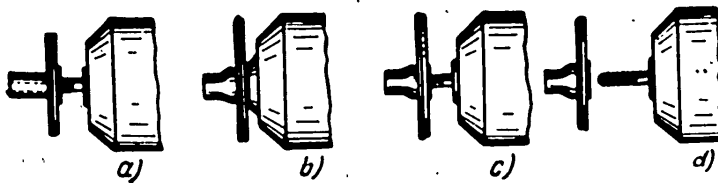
Sequence of Operations in Riveting Threaded Shell Rivets with
